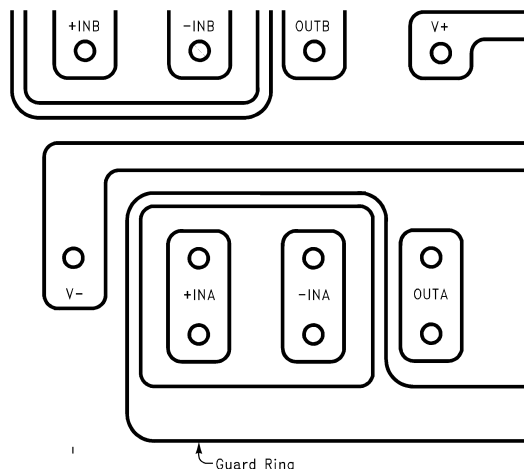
Example, using the LMC6036 of Guard Ring in PC Board Layout
